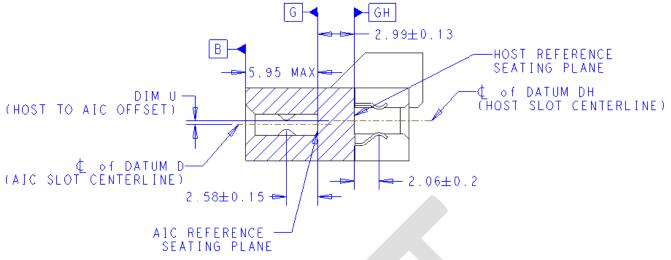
4C+ STRADDLE MOUNT CONNECTOR DIMENSIONS – REAR VIEW (MM)
